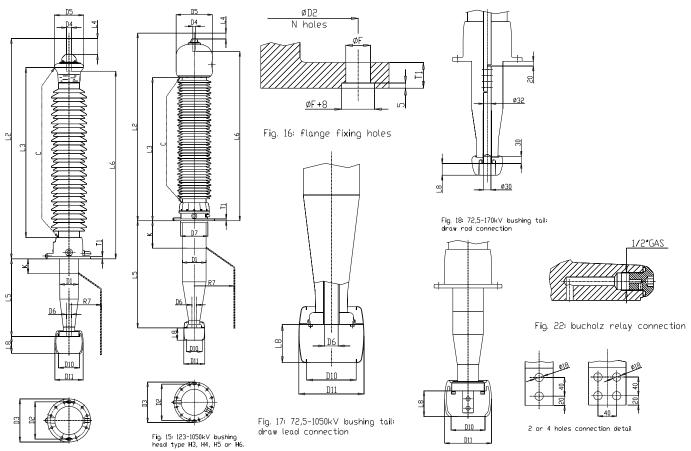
72,5-170kV bushing head type H1 or H2.
